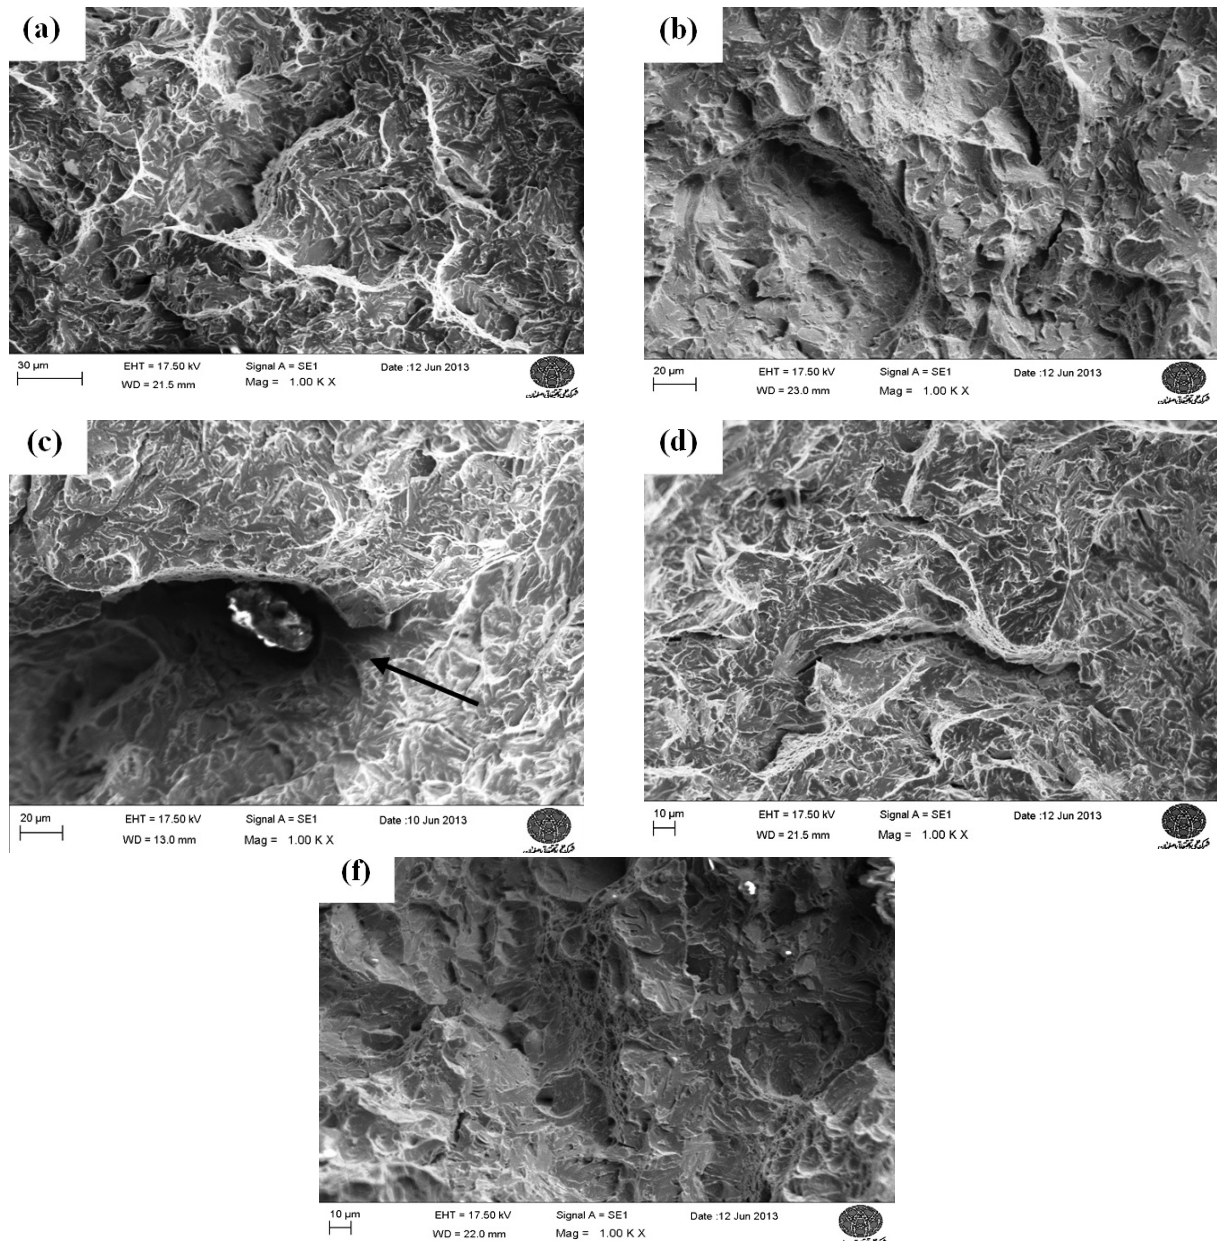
SEM images from fracture surfaces of base metal of samples: (a) T-480, (b) T-560, (c) T-620, (d) T-680 and (e) AW.
